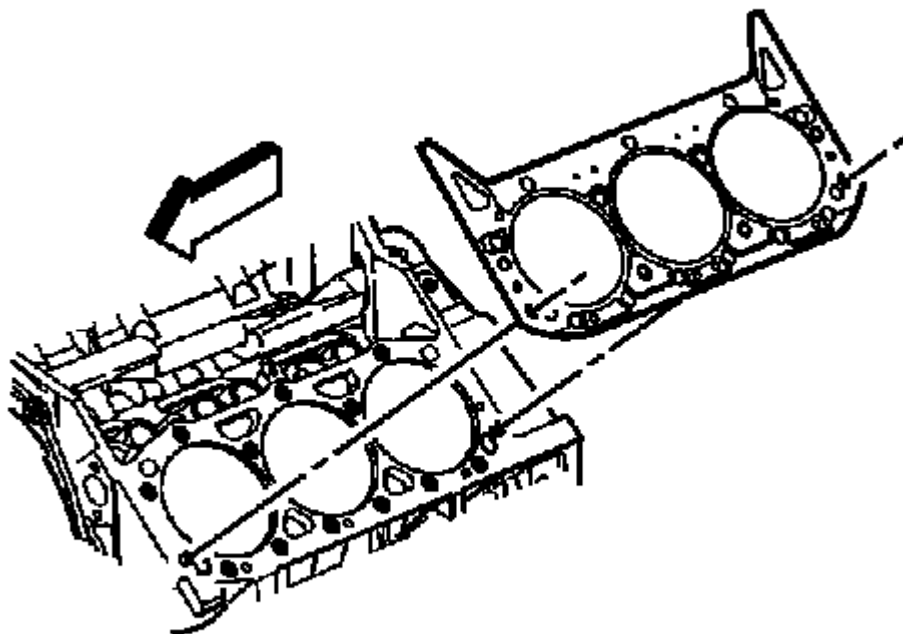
View Of Cylinder Head Gasket And Alignment Pins - Left
